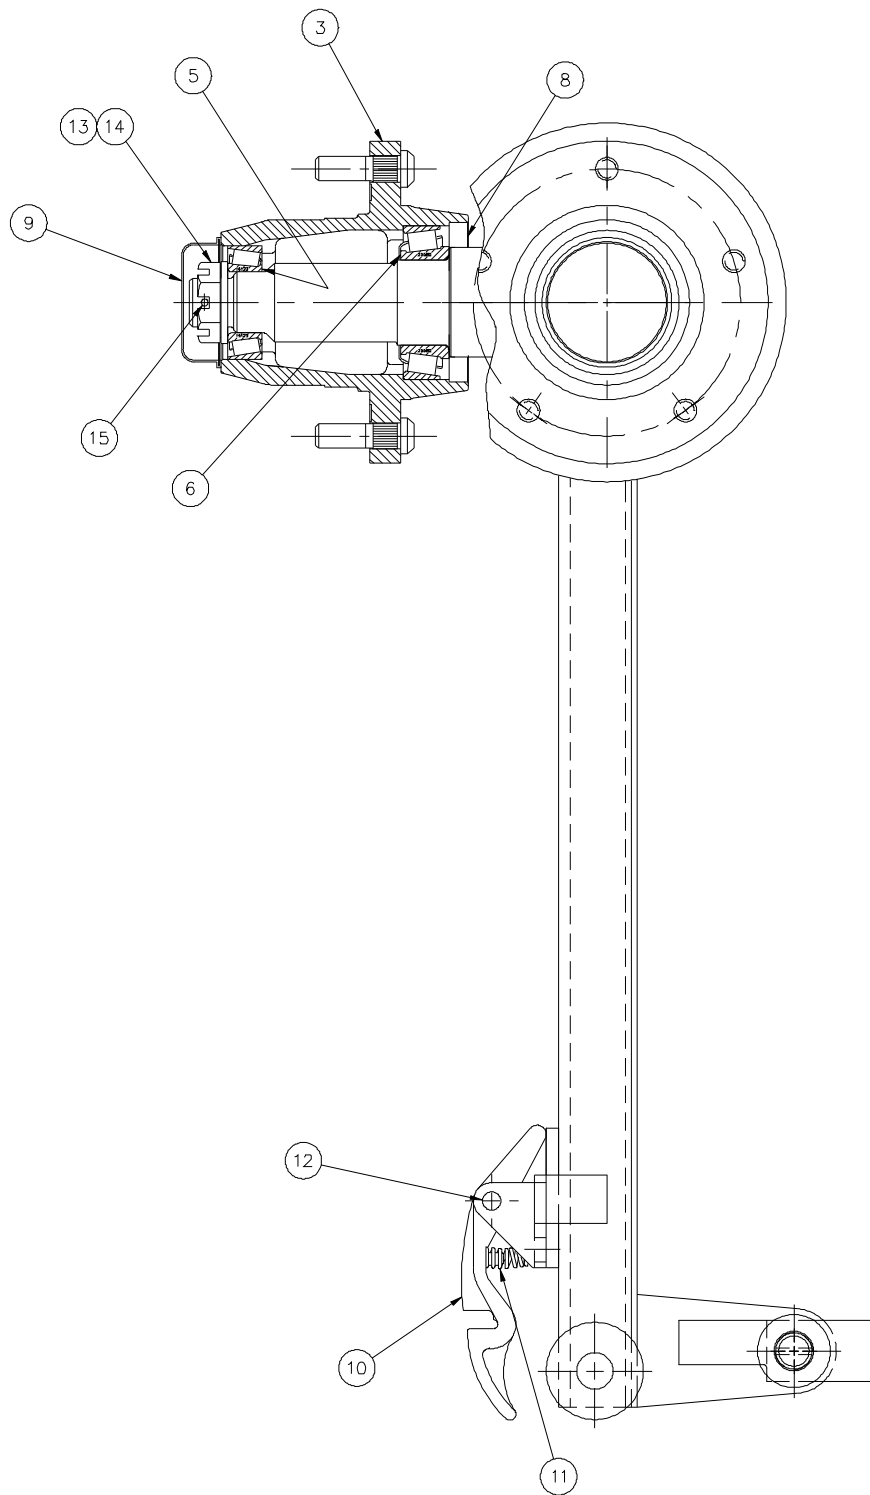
Front Axle Assembly (Sheet 2 of 2)
